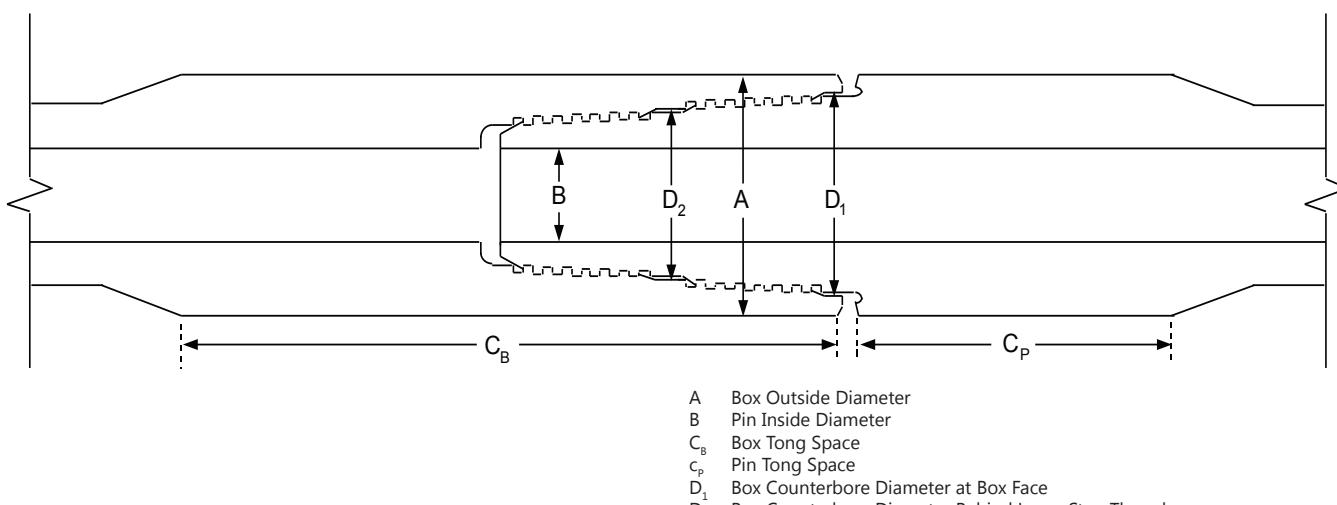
Tool joint dimensions for Hydril Wedge Thread™ connections.
